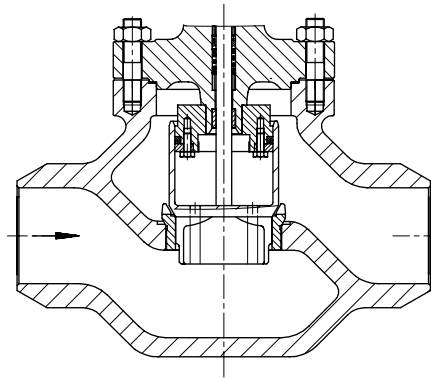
· Type 3251 Globe Valve with welding ends and balanced valve plug
